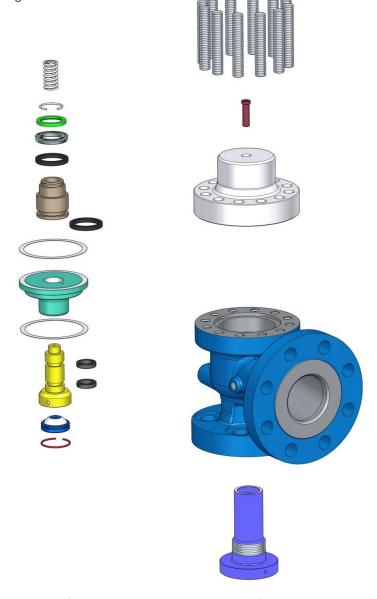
MAIN VALVE EXPLODED VIEW
